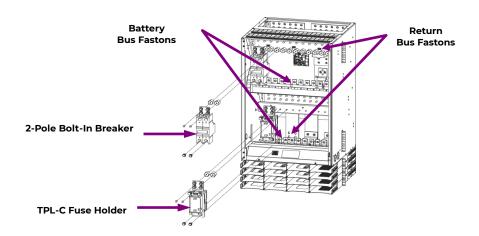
Bolt-In Breaker or Fuse Holder Mounting
